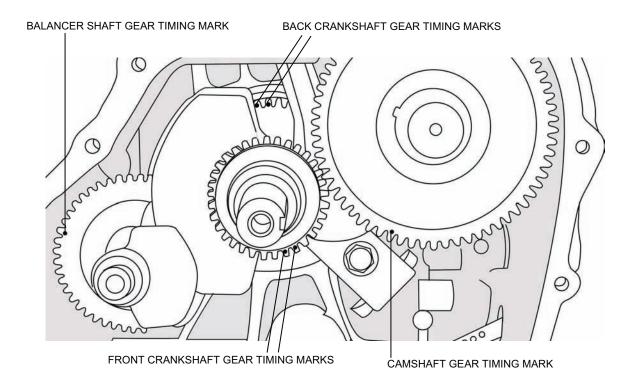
Crankshaft, Camshaft, and Balancer Shaft Timing Marks.
